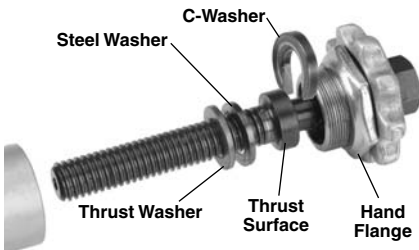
Unit Assembly: Orient C-Washer and Steel Washer With Chamfer Towards Thrust Surface
